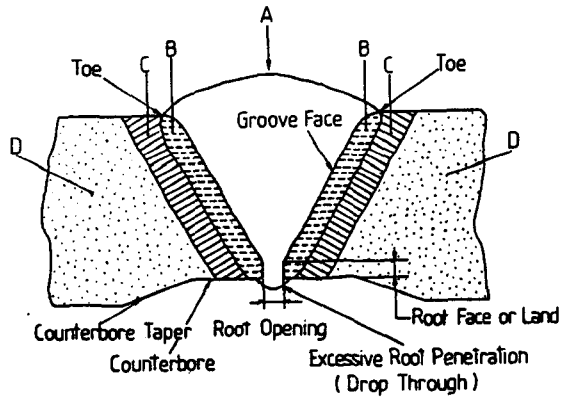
A typical pipe weld cross section configuration.
